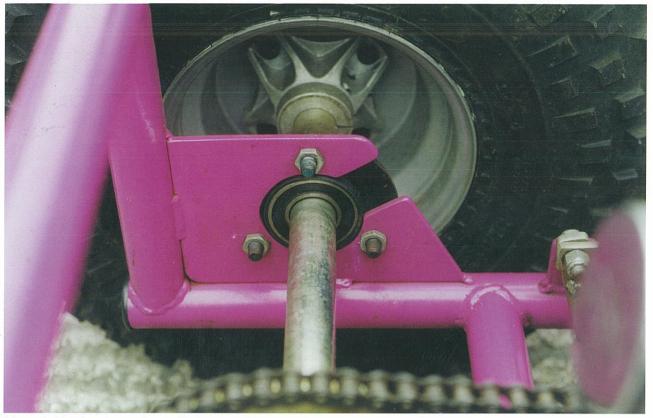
The bearing, axle and hub assembled on the completed Buggy. (Paul Buckland)
